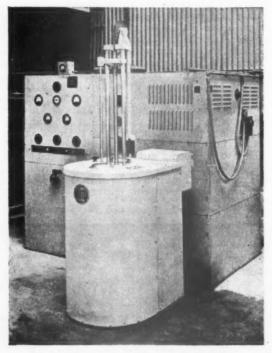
Automatic machine for surface-hardening steel shafts up to 24 in. long.
